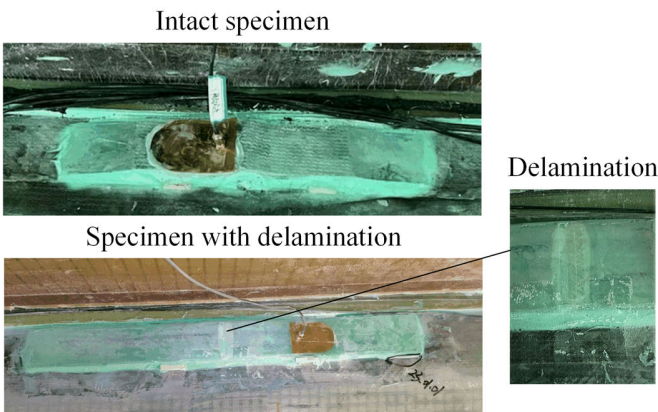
THE INTACT AND DAMAGED SPECIMEN BONDED ON THE WTB GIRDER
